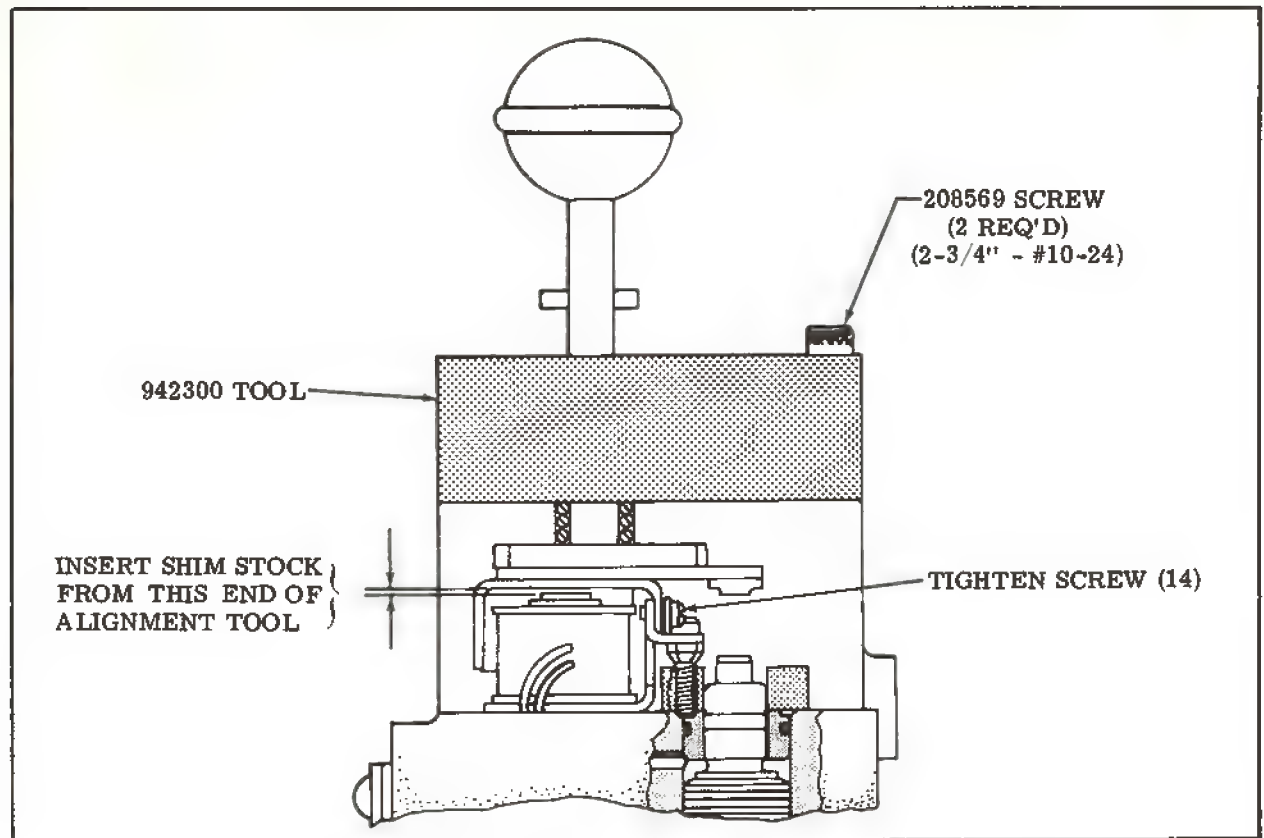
INSTALLATION OF FLAPPER ALIGNMENT TOOL (942300).
